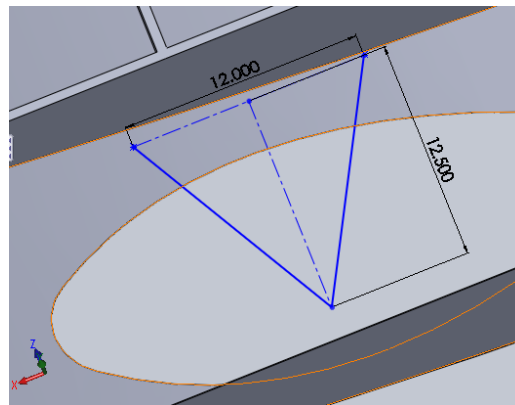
Front Suspension Linear Sketch in Inches
